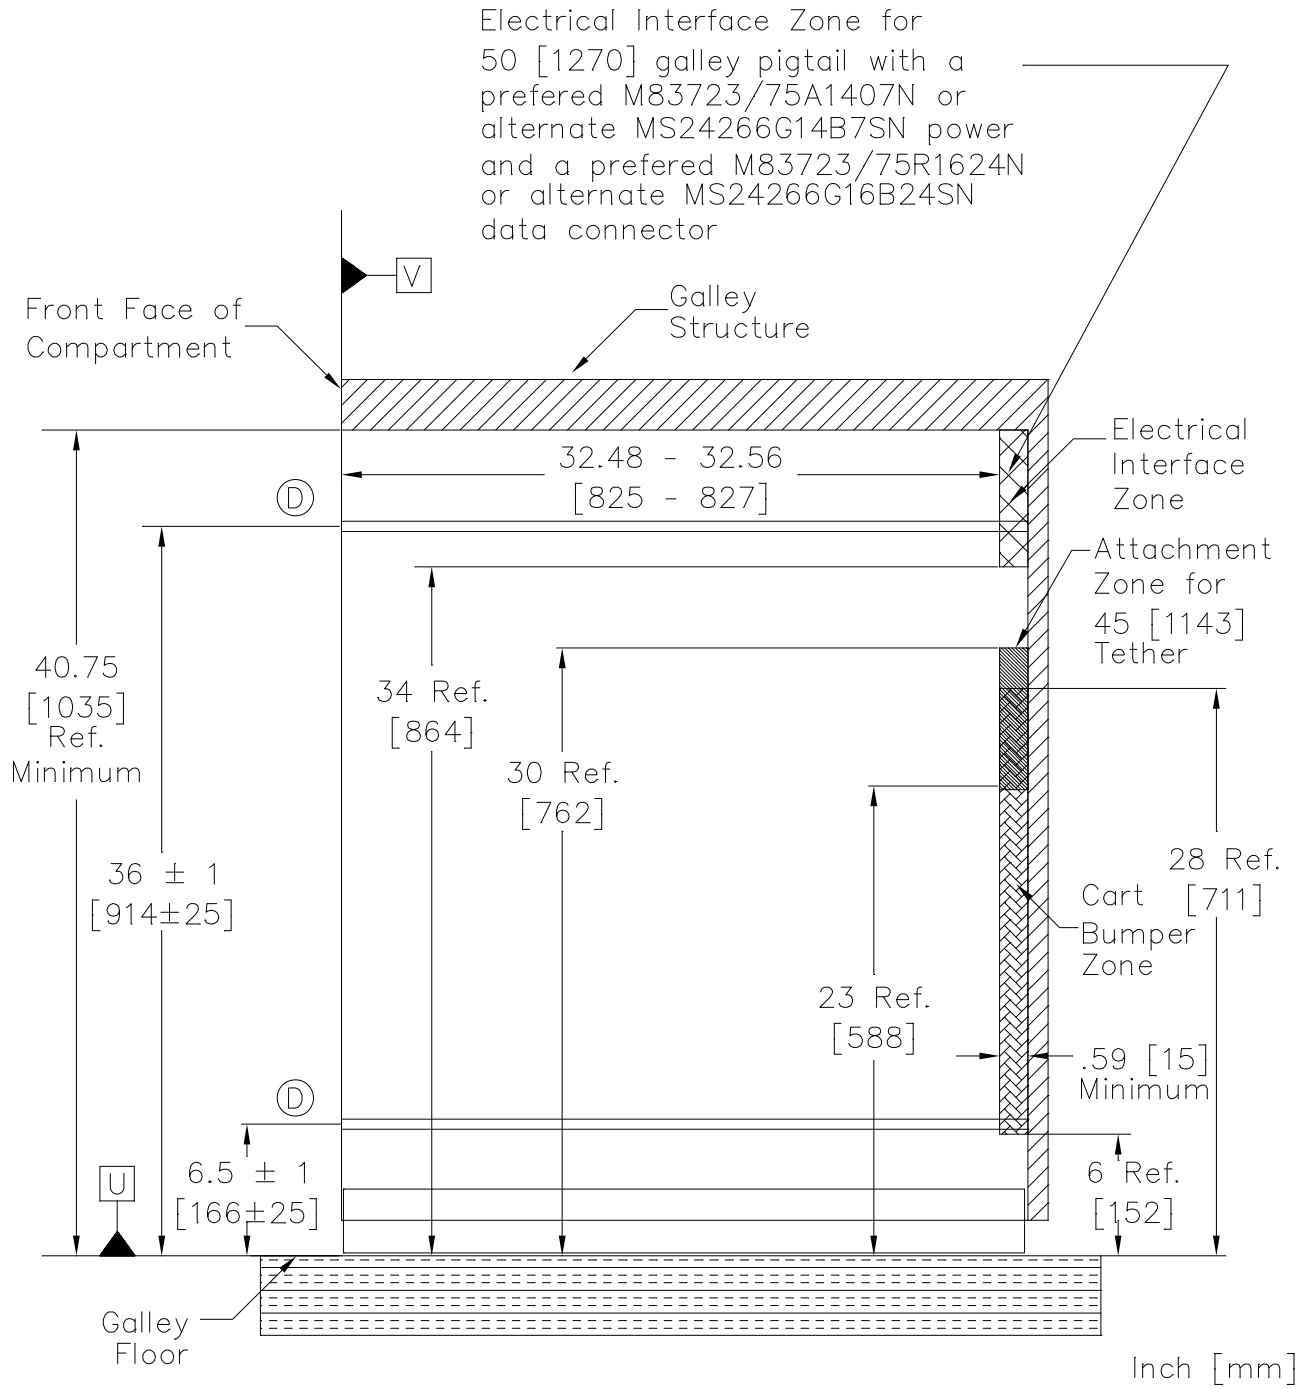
B – GAIN Size 3 Compartment Structure and Electrical Drawing - Side View
